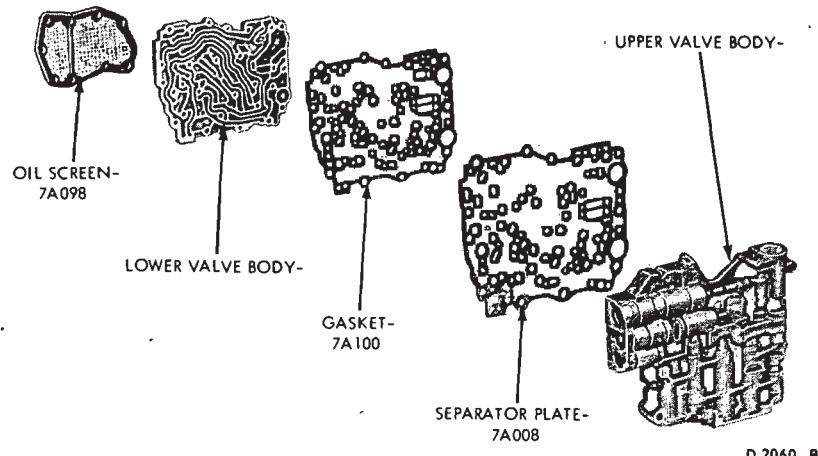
Upper and Lower Valve Bodies Disassembled—C4S Semi-Automatic
